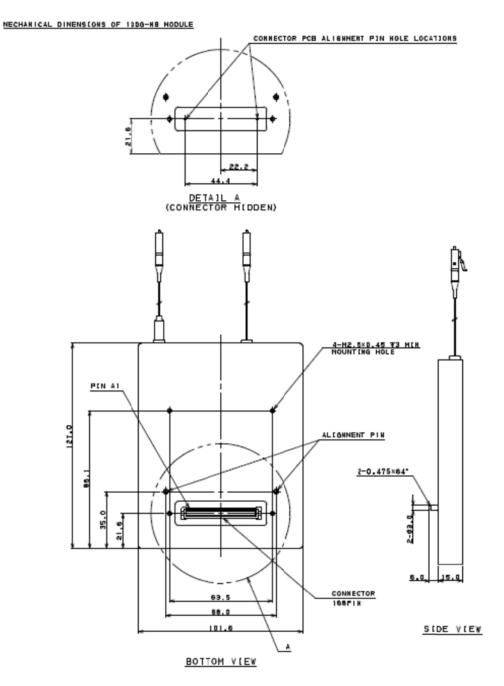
MSA-100GLH Flattop mechanical dimensions - bottom/side views
